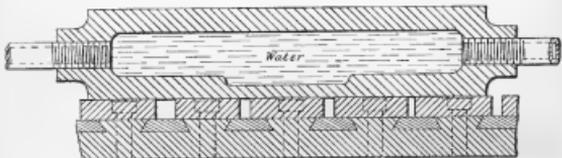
Wicks rotary typecaster; hard moulds. Scale: full size.
